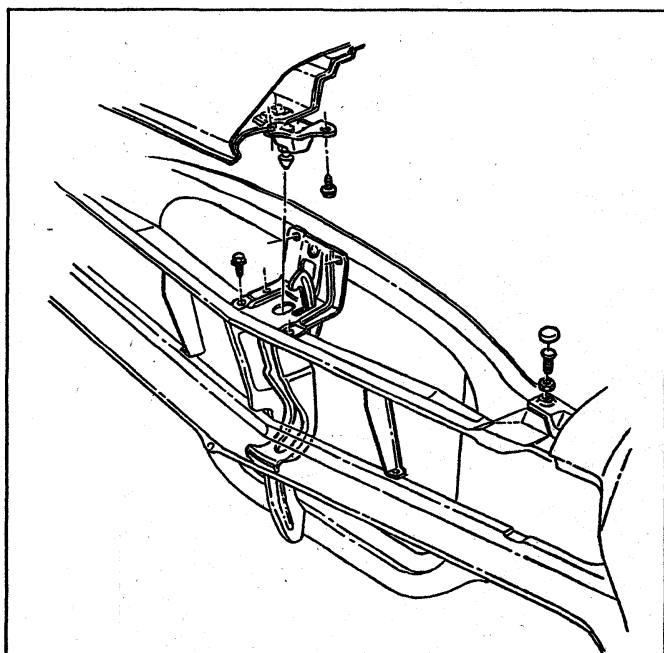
Hood Catch and Lock Plate - Chevelle Shown
